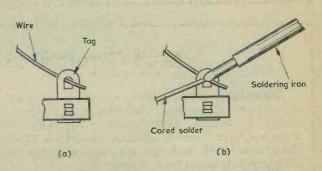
(a). The wire shown here is to be soldered to the tag (b). The tip of the hot soldering iron and the solder are both applied at the same time to the work pieces. The molten solder first speeds the transfer of heat from the iron to the work pieces, and then flows over the pieces to produce the joint.
